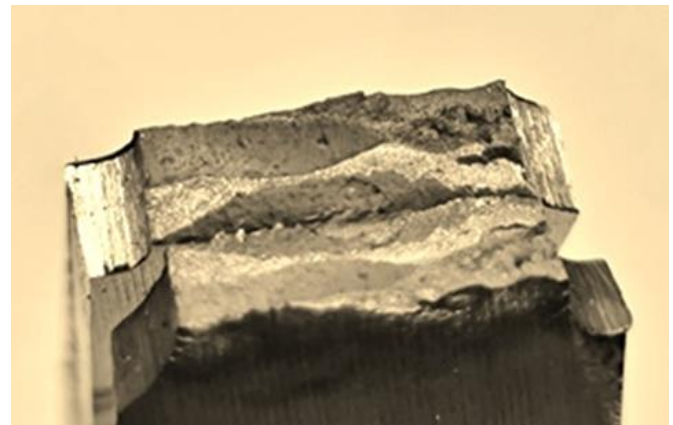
Fractography of the weld produced using the OK92.18 electrode
